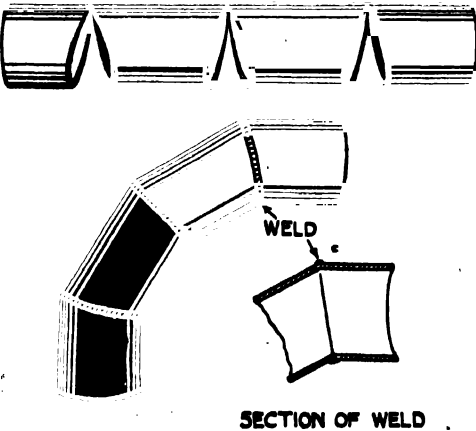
Method of making bend from length of steel pipe by use of oxy-acetylene cutting and welding. Segments are cut with the oxygen hand cutter (*as* above) and pipe is then bent.
